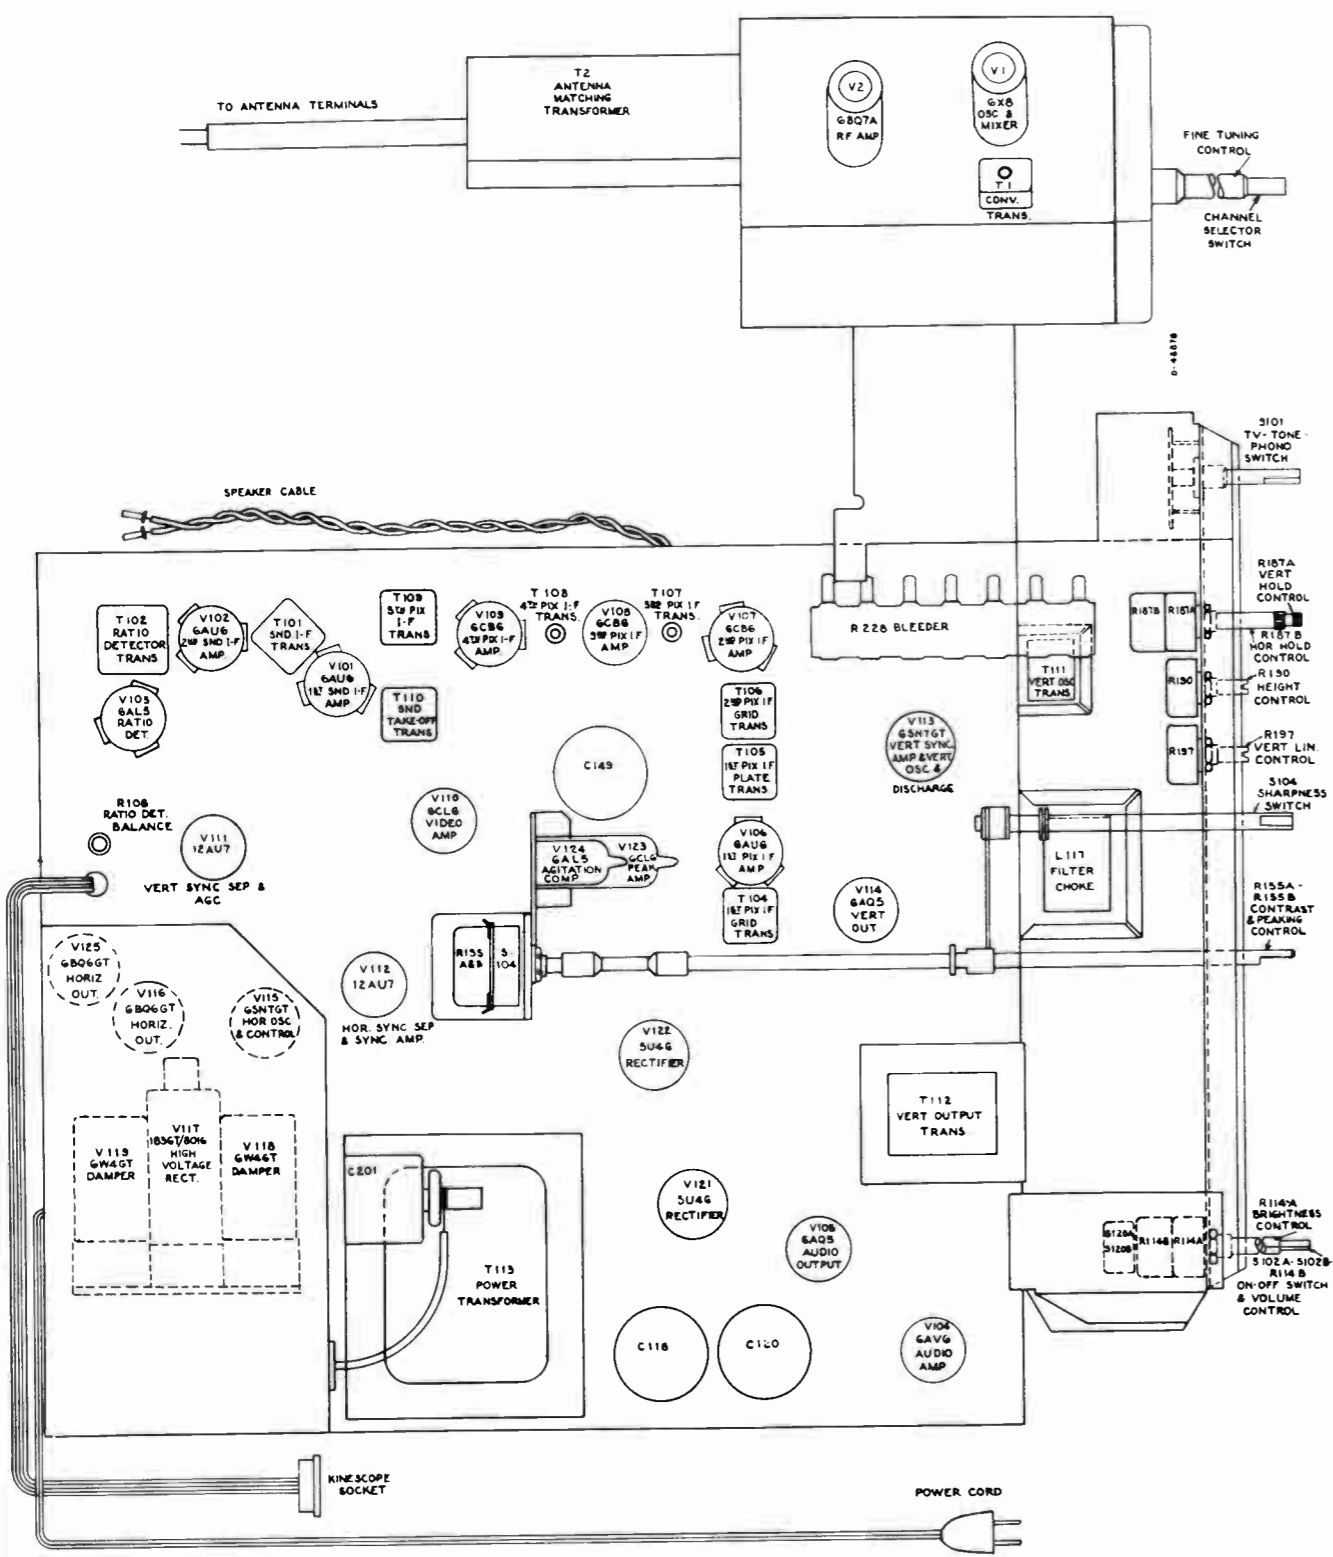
Chassis Top View (shown with KRK22A Tuner)
